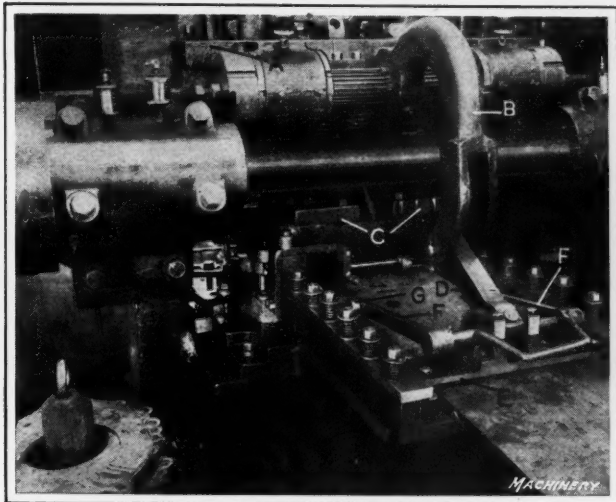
Power Press with Special Attachment for automatically feeding Strip Stock into the Die when producing Stator Stampings
